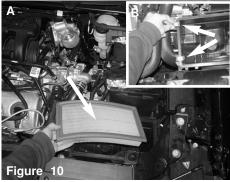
Figure A: Remove the factory filter panel from the lower portion of the air box assembly. Figure B: Flip the two retaining clips from figure 8 inwards to secure them. The lower air box assembly will be retained
